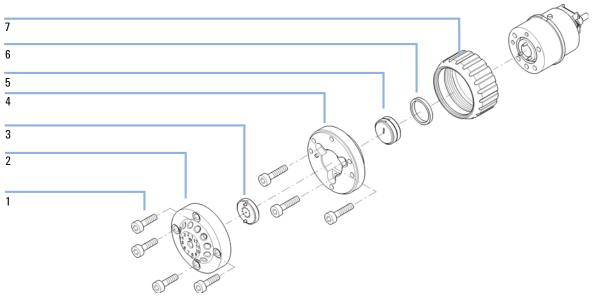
Valve Head Parts (example shows a 5067-4159 valve head)
